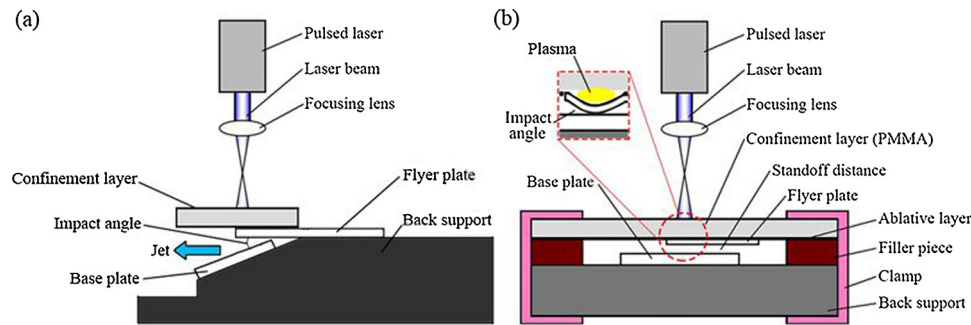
Diagram of the laser impact welding: (a) Angle welding setup [2]; (b) Parallel welding [2].
